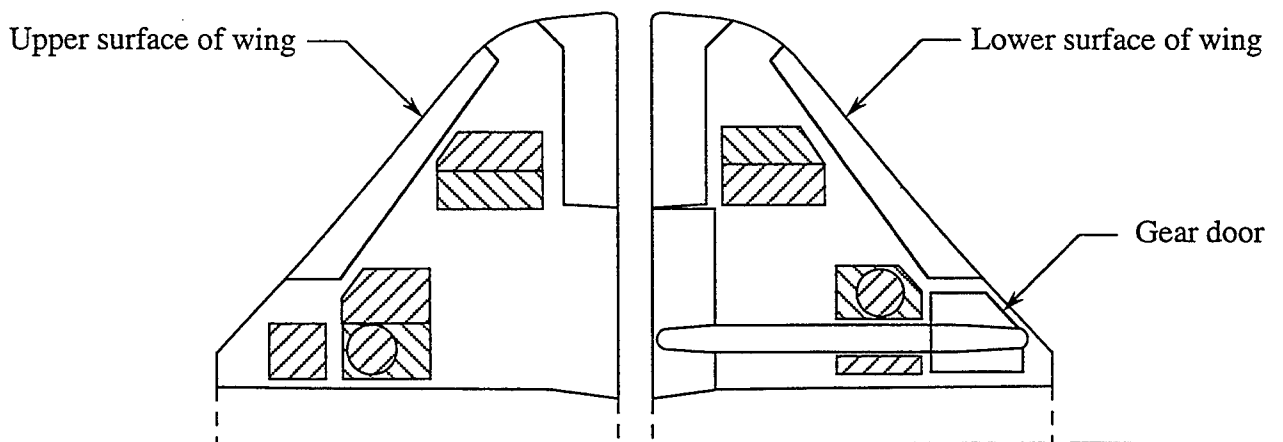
Upper and lower wing surfaces on an A-4B aircraft showing removable panels (shaded)
